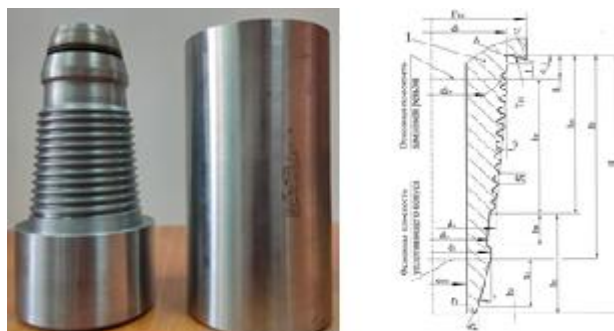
Threaded Tool Tapered Drill Pipe Connection
